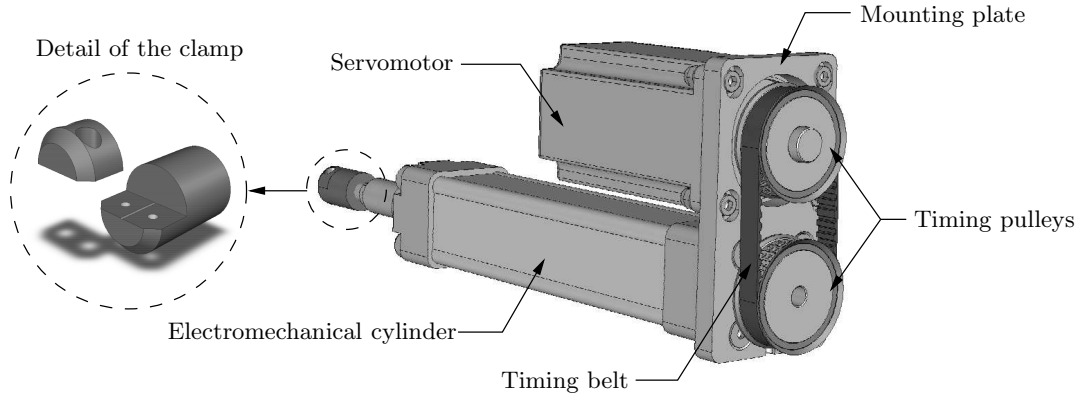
Design concept of the side-driven mounting system, with a belt side drive.
